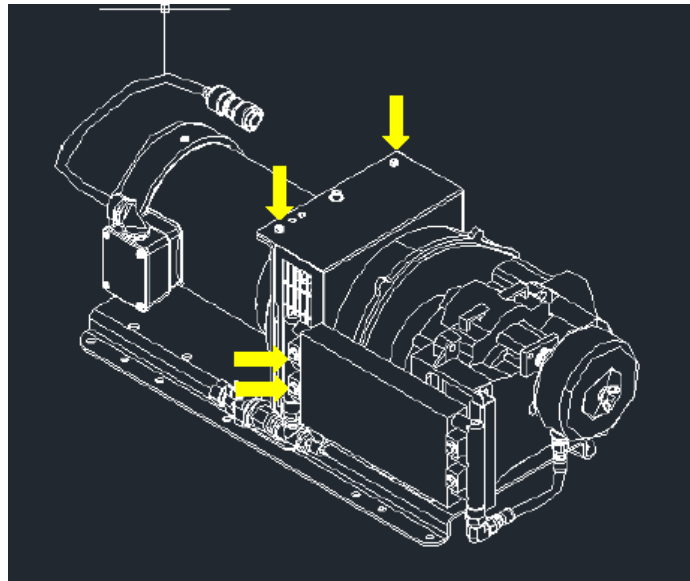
Coupling Guard & After Cooler Support Block Screw locations.
